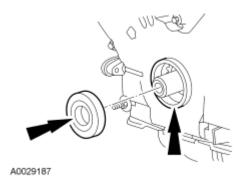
Locating Crankshaft Front Seal Courtesy of FORD MOTOR CO.
